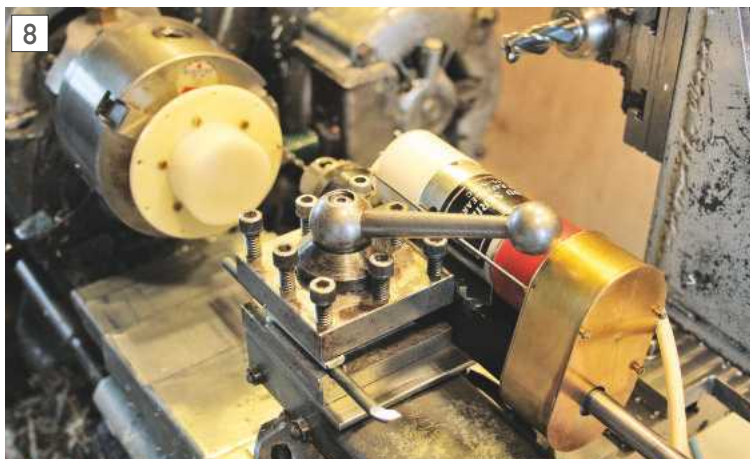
shows another lighter milling/drilling spindle made for axial machining to obviate the need for moving the heavier milling spindle from the rear of the cross slide. This spindle has a simple $\frac{1}{8}$ inch base plate that is clamped under a turret tool holder on the top slide. This milling spindle's housing is arranged so that the spindle axis is fixed and aligned at the centre height of the lathe mandrel. It has a $\frac{3}{8}$ inch spindle fitted with a $\frac{5}{16}$ inch chuck and is driven by a geared DC motor with a further reduction gear to the spindle below. The spindle protrudes from the rear. As above this spindle can be easily aligned with the lathe mandrel axis using a chuck in the tailstock and a rod in the spindle chuck, checking a centre line reference at the headstock end before clamping with the tool post clamp bolt. This also gives a reference centre line reading on the cross slide.
